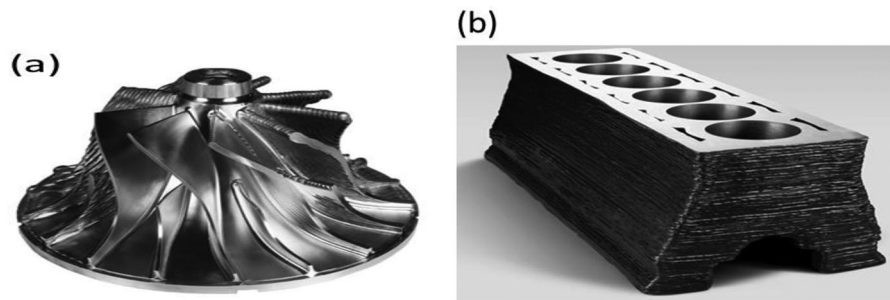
(a) Impeller shaft produced by Harlow-FasTech using a combination of WAAM and machining. Reprinted from Ref. [93], (b) An example of a part printed by Lincoln Electric via WAAM. Reprinted from Ref. [94].
